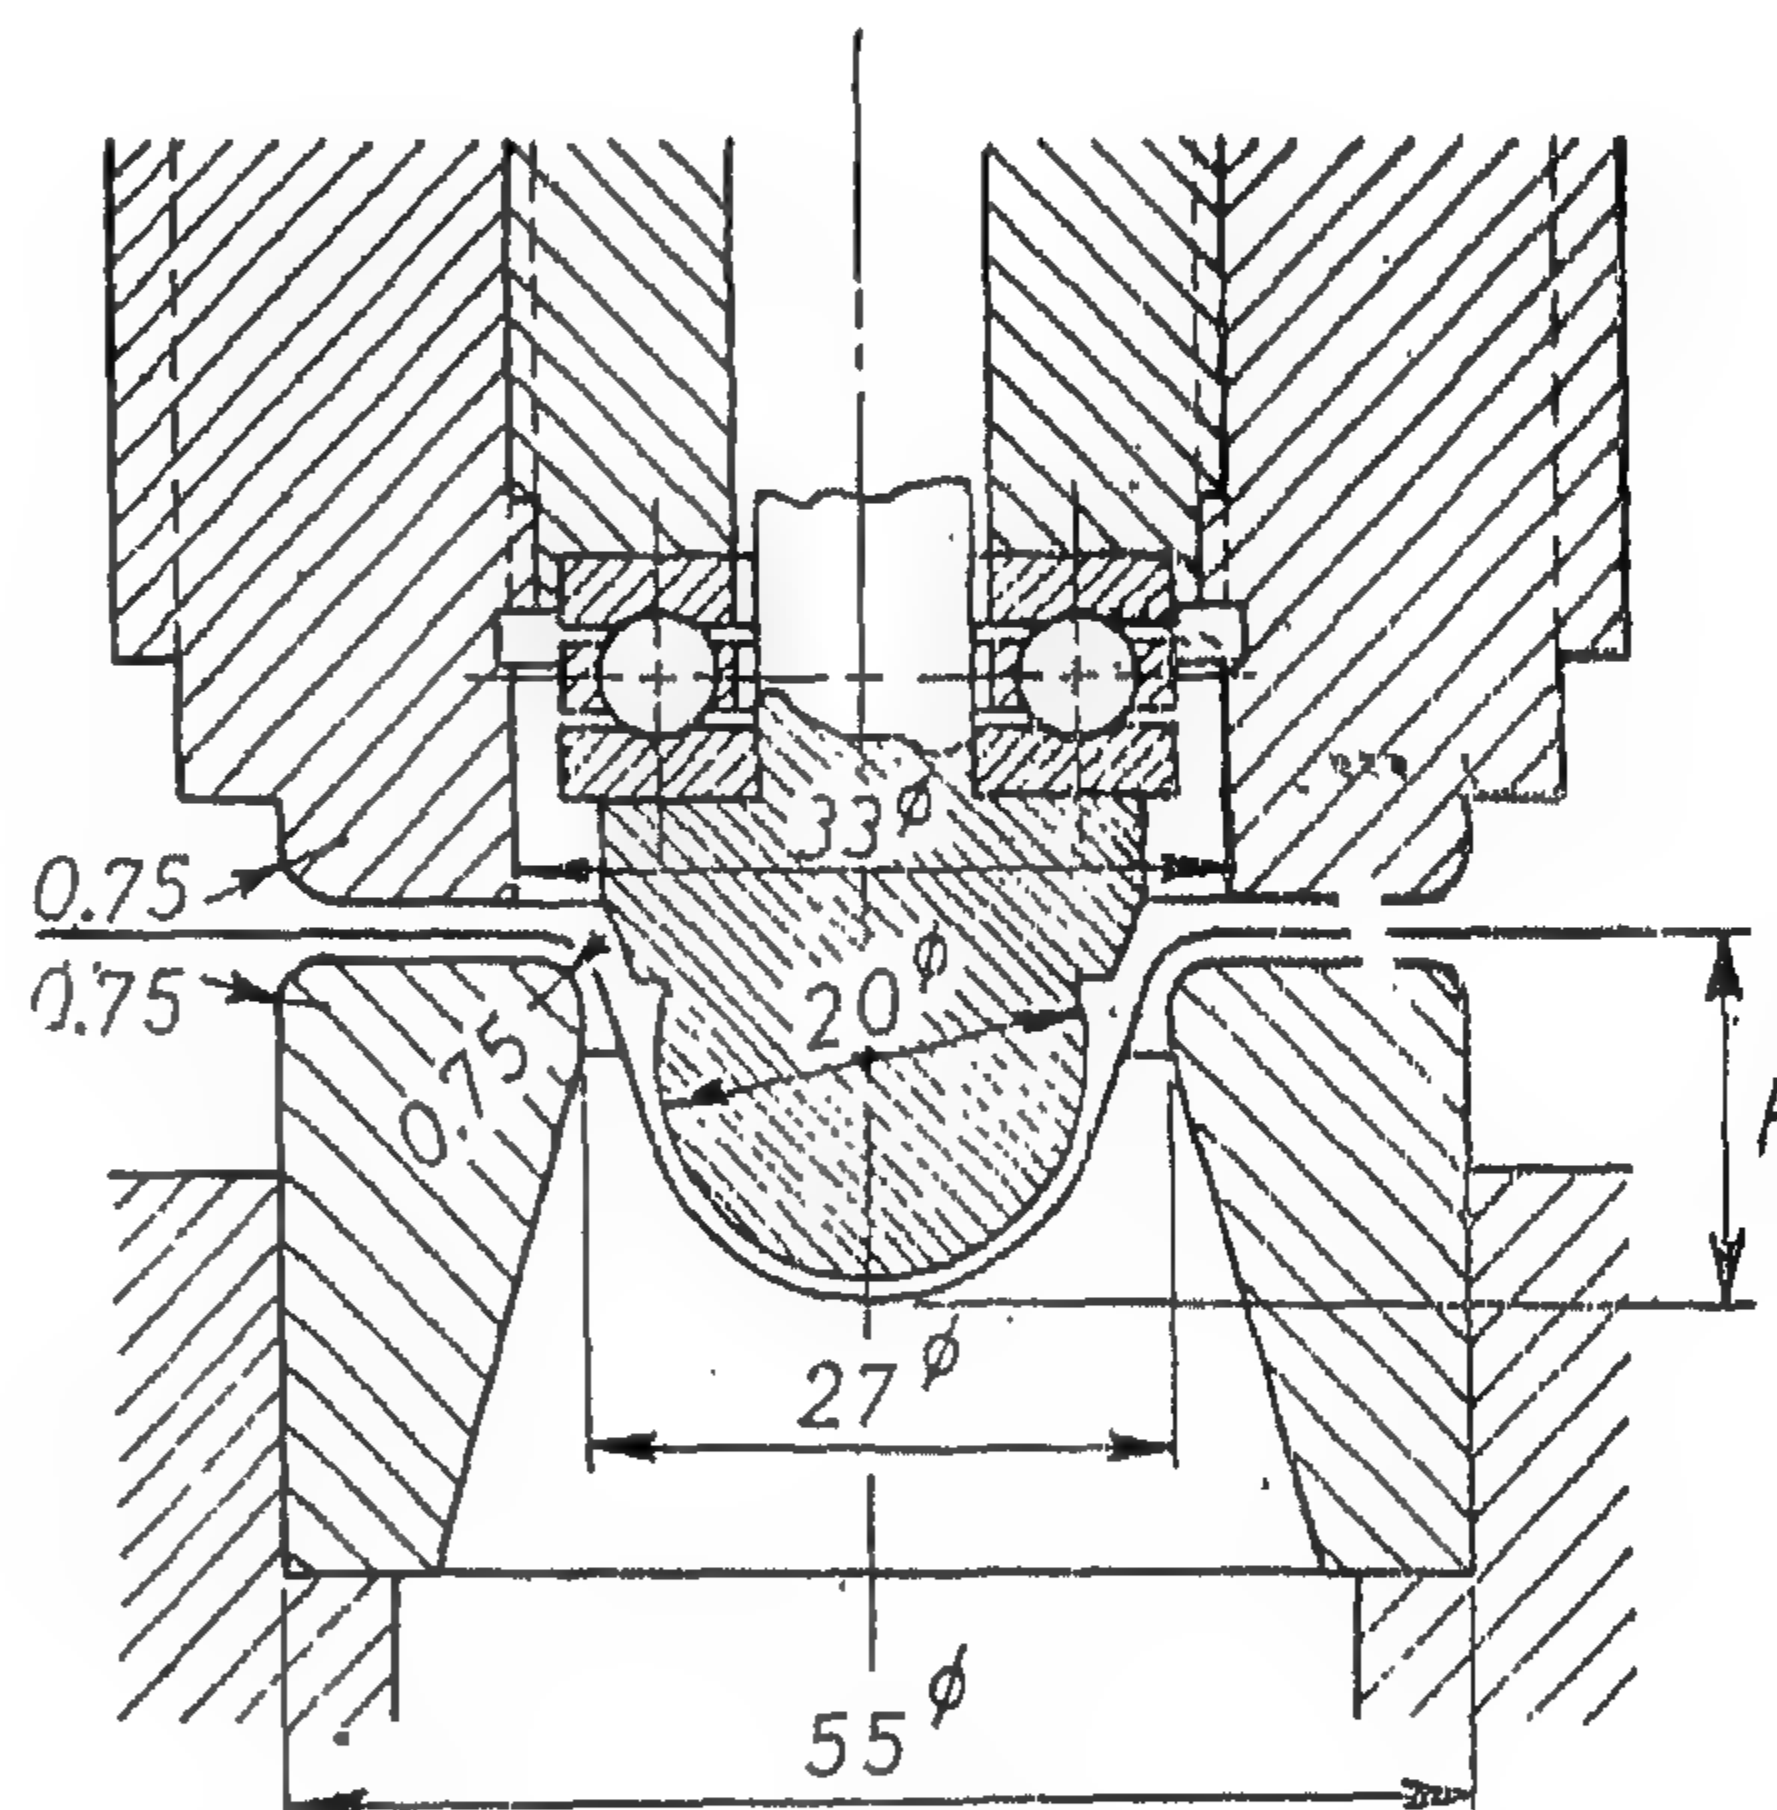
Form and dimensions of tools used for performing the Erichsen Test in accordance with the German Specification DIN 50101. (Dimensions in mm.)
